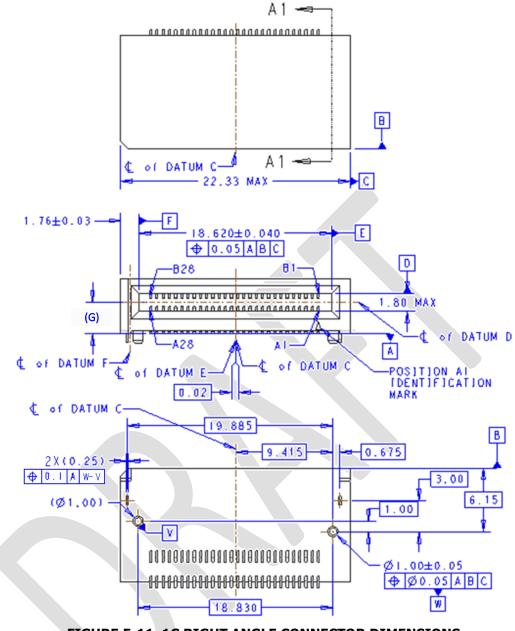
1C RIGHT ANGLE CONNECTOR DIMENSIONS
